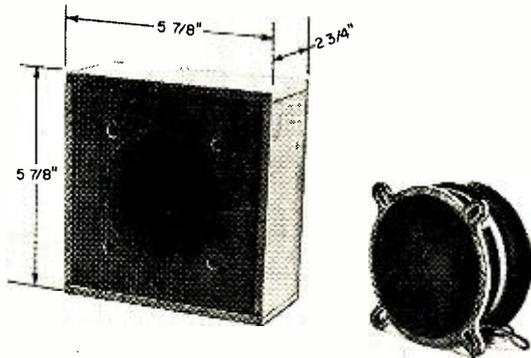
An enclosure (left) must be used with "Super 3" tweeter (right). Speaker mounting hole should be chamfered to reduce high-frequency diffraction.
